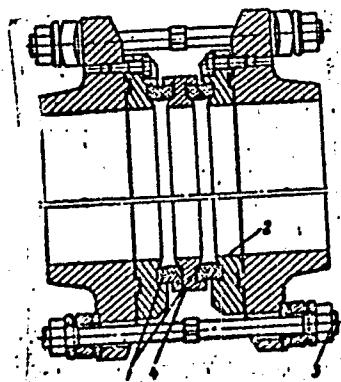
1 - elastic rubber elements; 2 - flange; 3 - coupling; 4 - floating ring.
